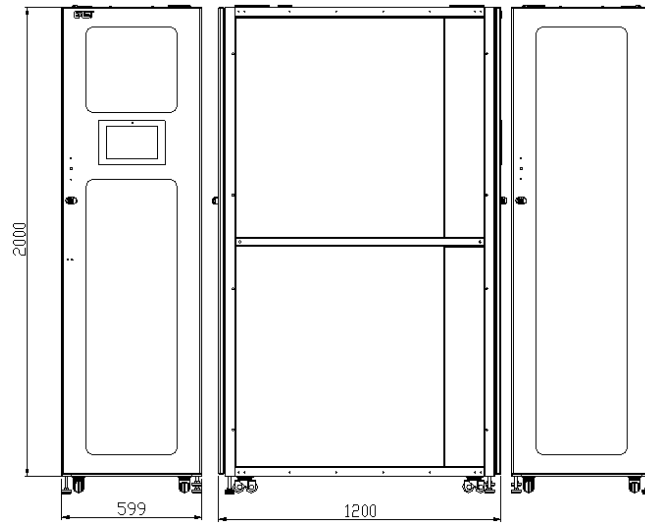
Dimension of 1200mm cabinet of MC1000 single cabinet, in mm)
